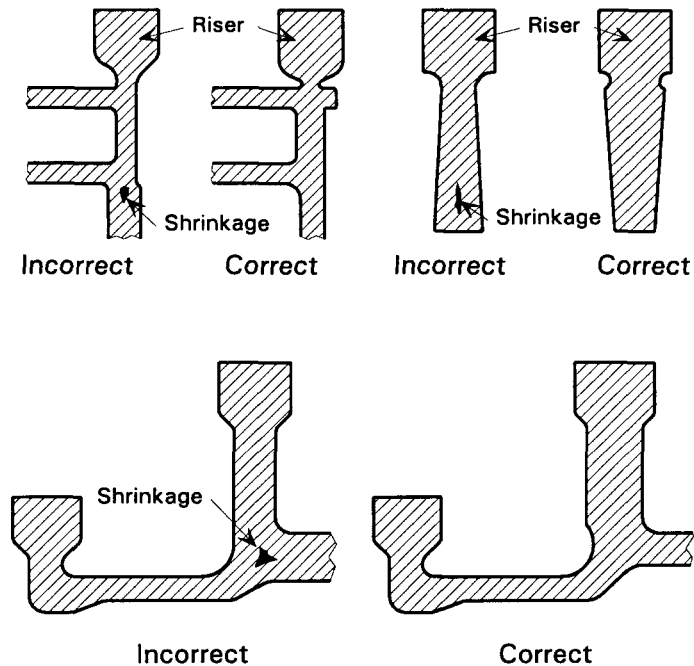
Examples of design sections showing correct arrangements to improve casting
